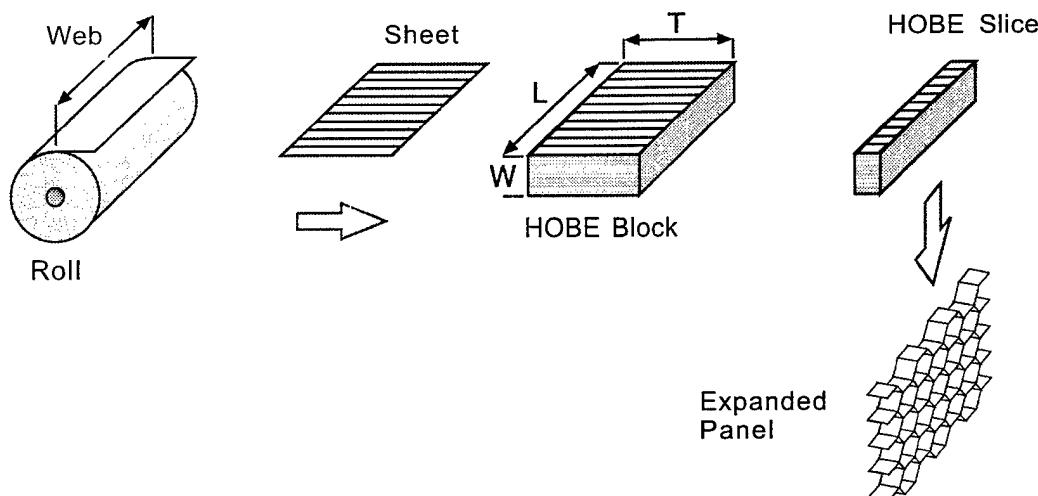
EXPANSION PROCESS OF HONEYCOMB MANUFACTURE
